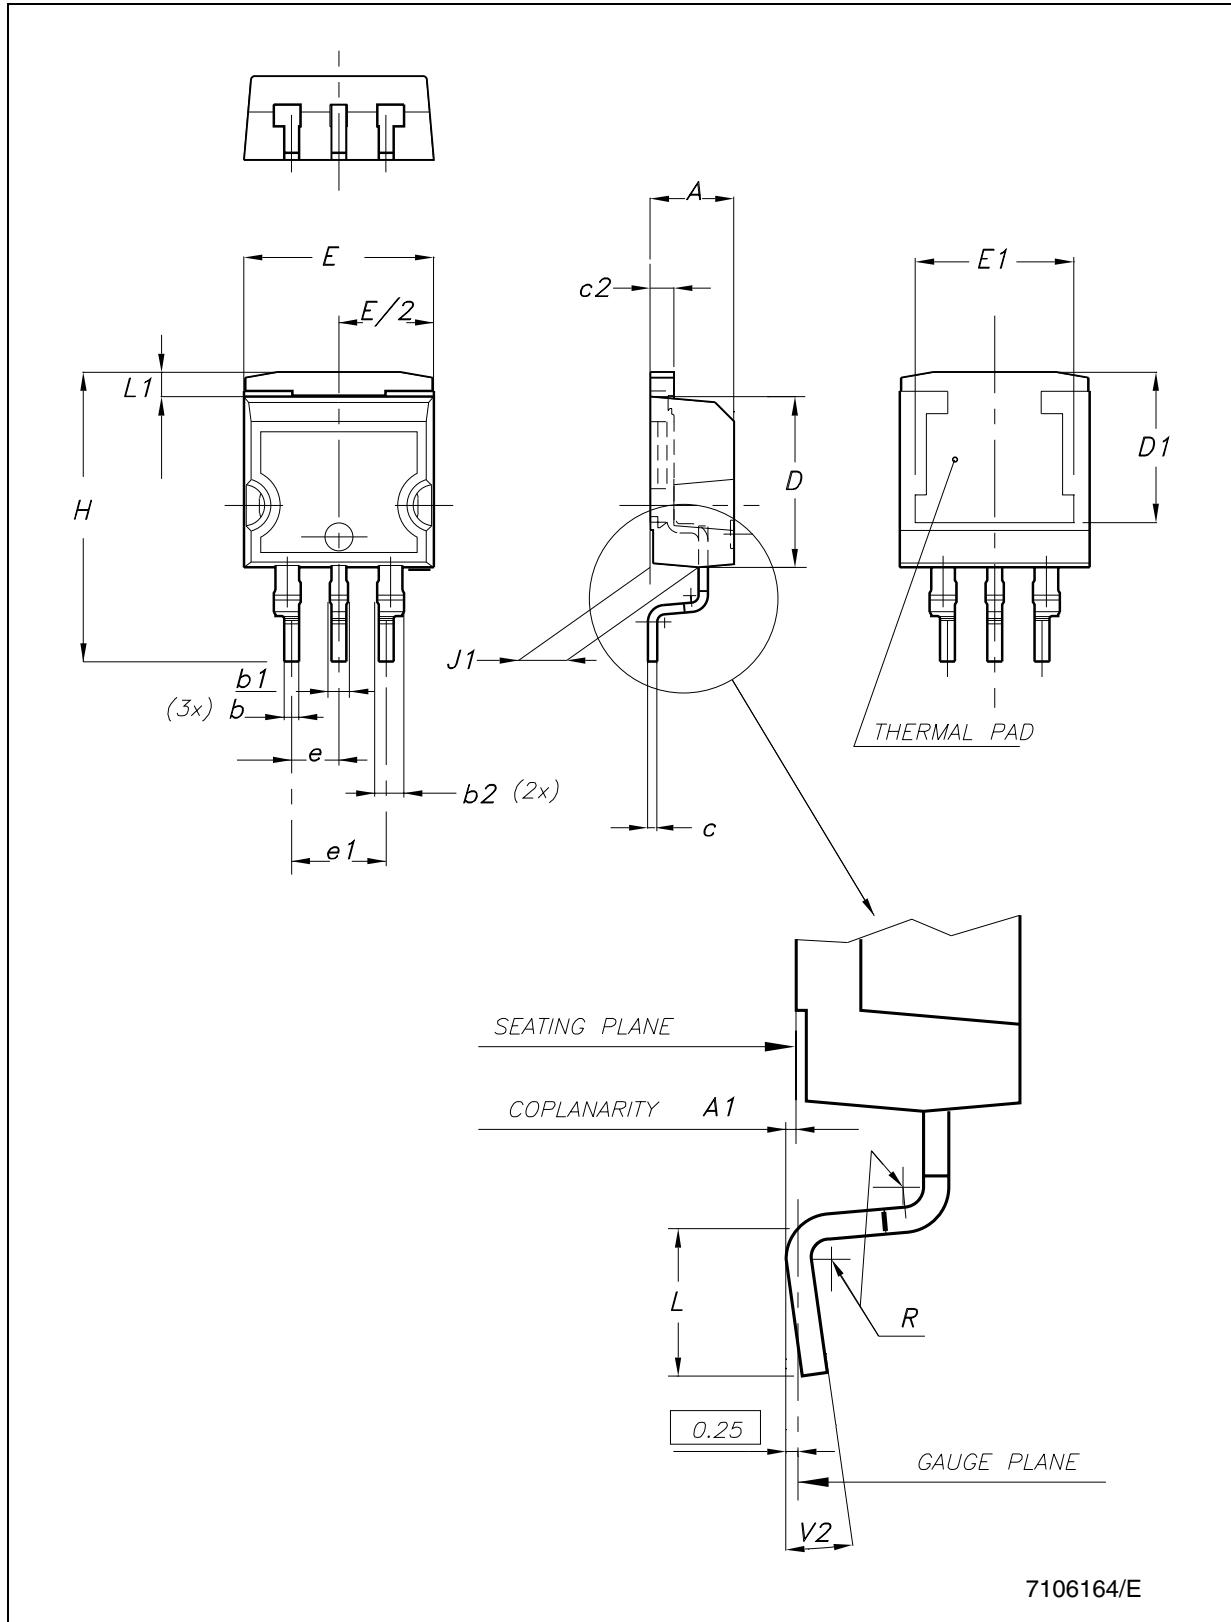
Drawing dimension D²PAK/A (type STD-ST)
